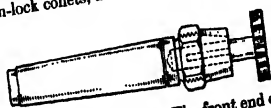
Woodruff keyway cutter chuck. The front end of the arbor is slightly tapered for a short distance and then threaded, and the hole in the nut is correspondingly tapered and threaded. The end of the arbor is split by three equally spaced slots, and tightening the nut serves to grip the shank of the cutter. This type of chuck is often called a *spring* chuck.
